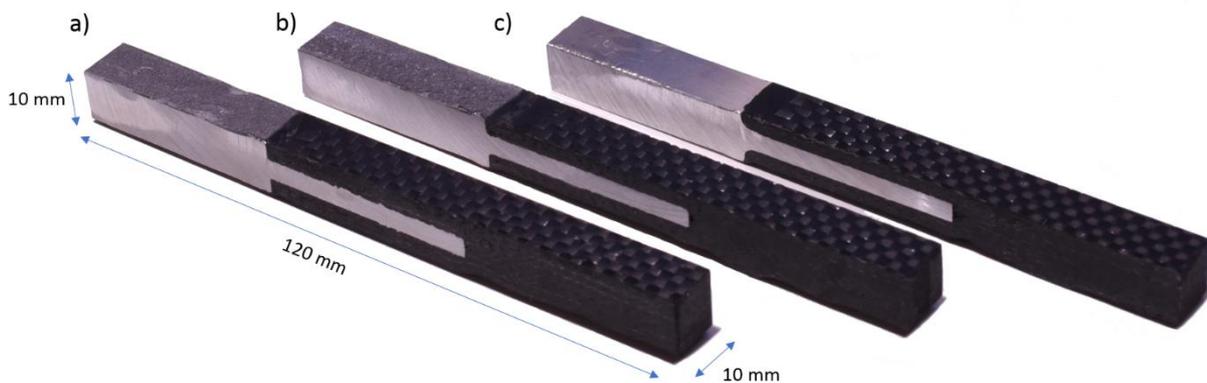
The finished samples after curing and milling to final dimensions a) AM part with scales b) AM part with no features c) milled part
